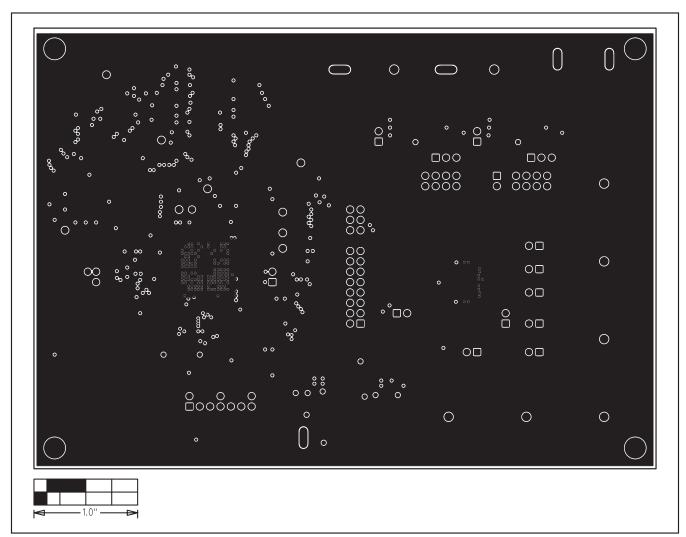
MAX11046 EV Kit PCB Layout—Inner Layer 5
